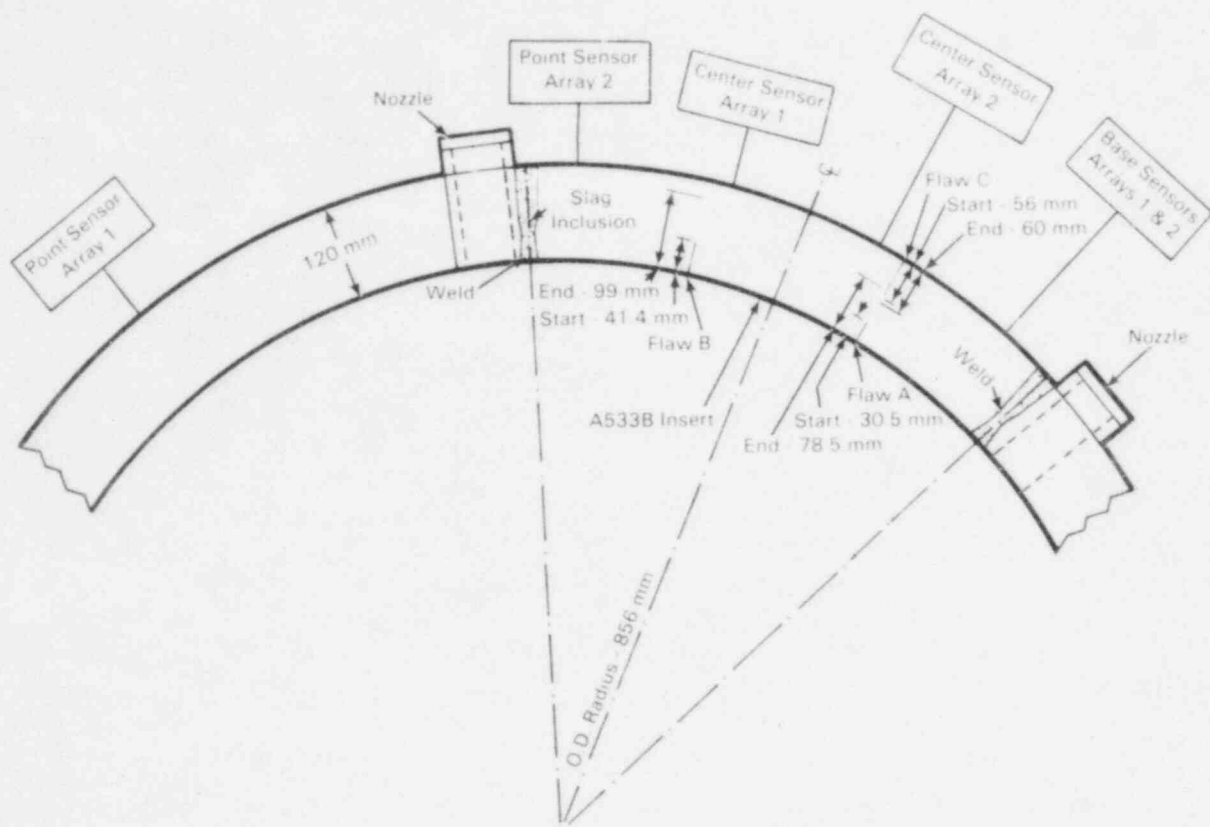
Section A-A Showing Through-Wall Relation of Quad Array AE Sensors to Machined Flaws.
